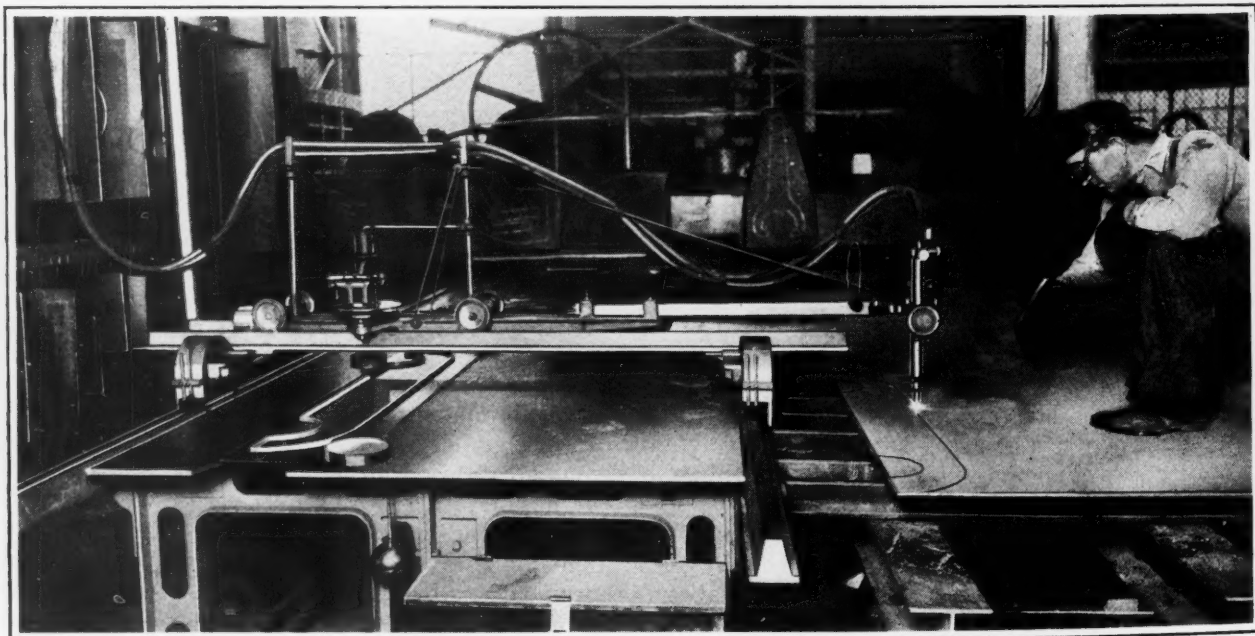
Cutting Heavy Plate with Automatic Shape-cutting Machine
